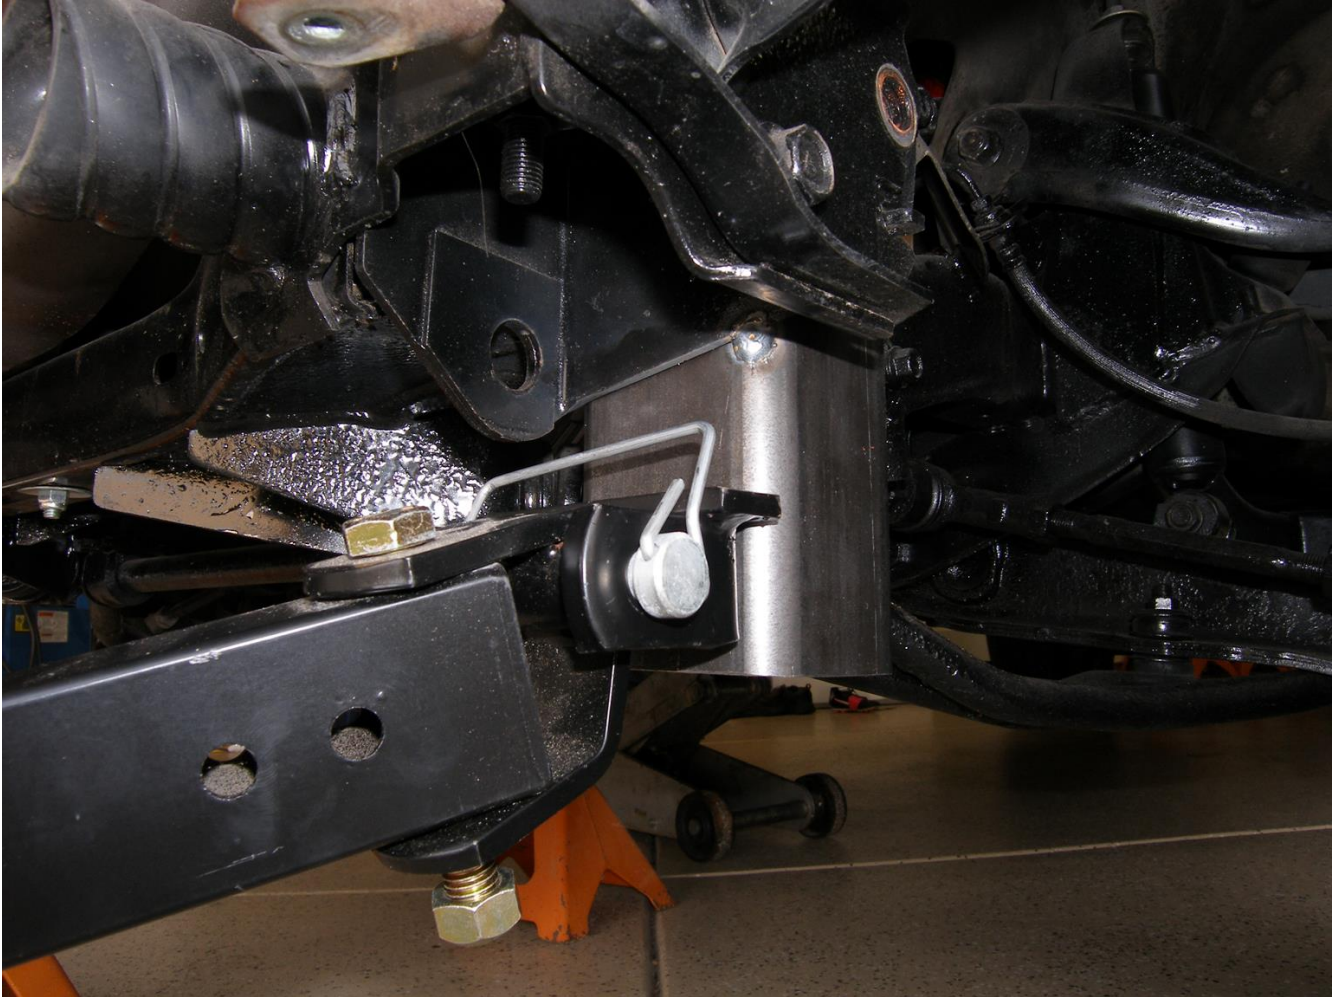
2 Detail of the work prior to full weld.
